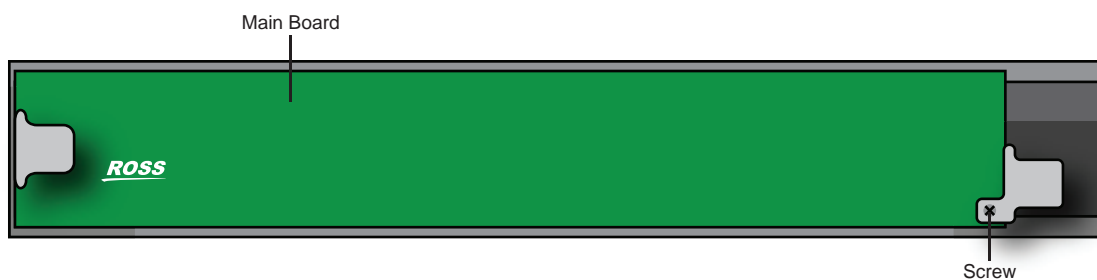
ULTRIX-FR2(-NS) — Location of Screw for Cooling Fan Module
